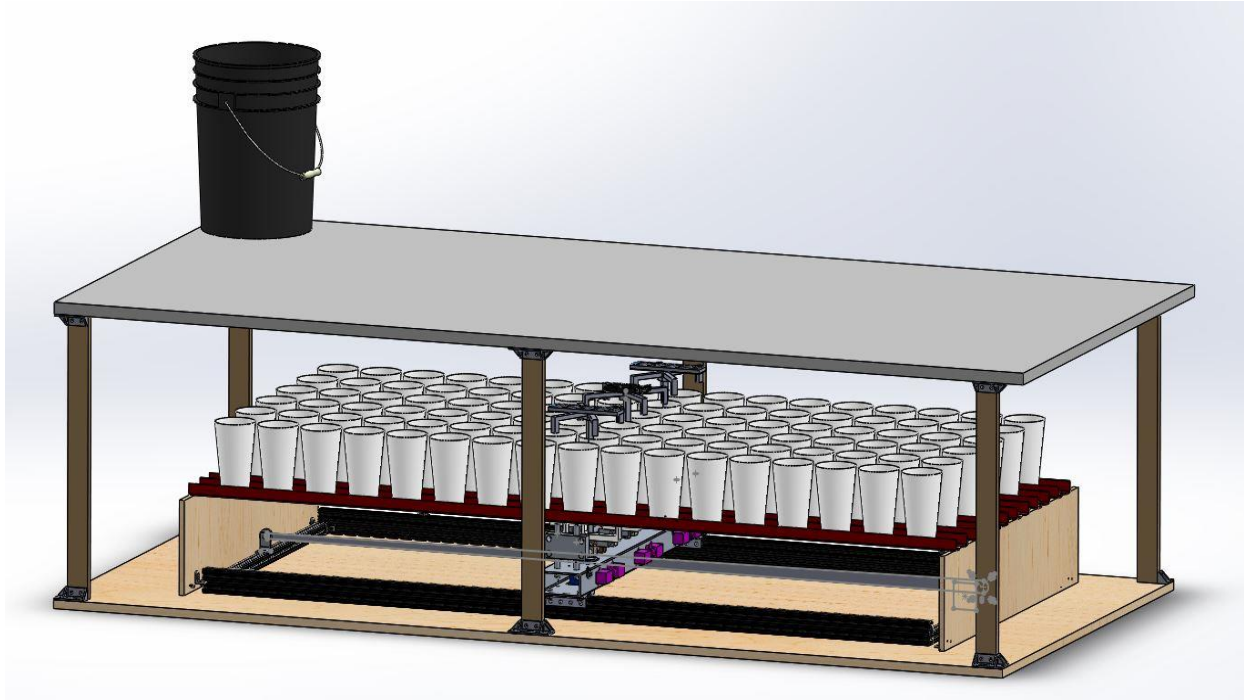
Solid Model of Prototype Soil Humidity Machine
